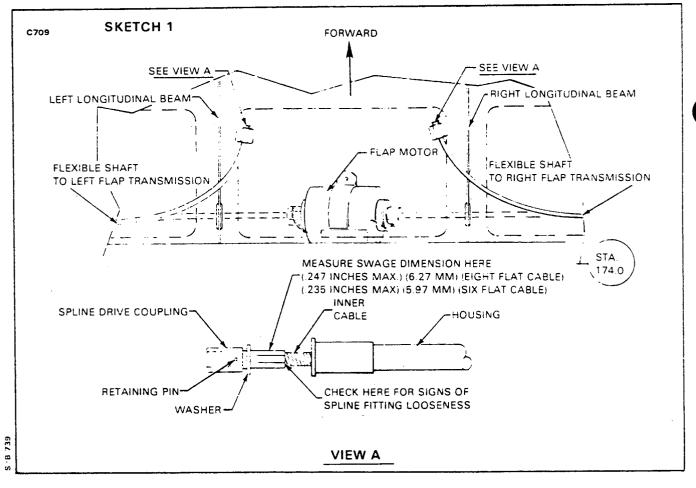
Wing Flap Actuator Cable - 500 Hour Inspection
